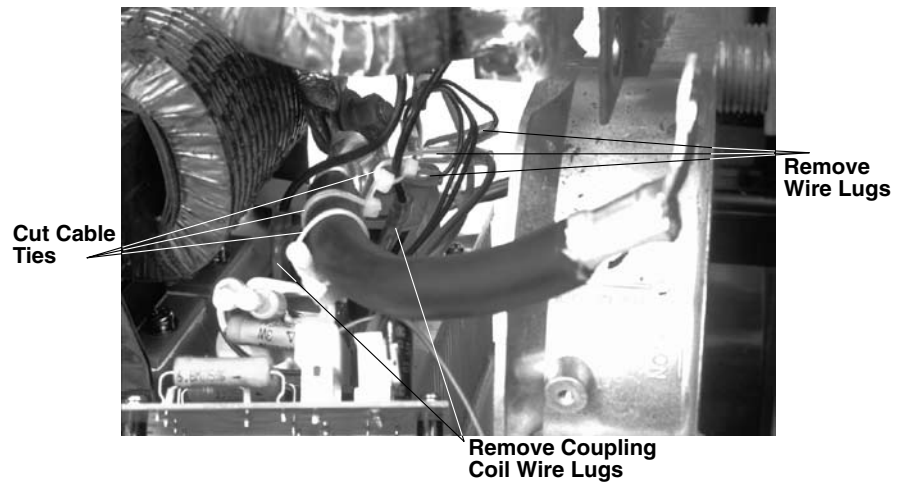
Output inductor assembly removal – lugged wires to be removed from terminals on HF Unit and related areas (shown in GTS model)
